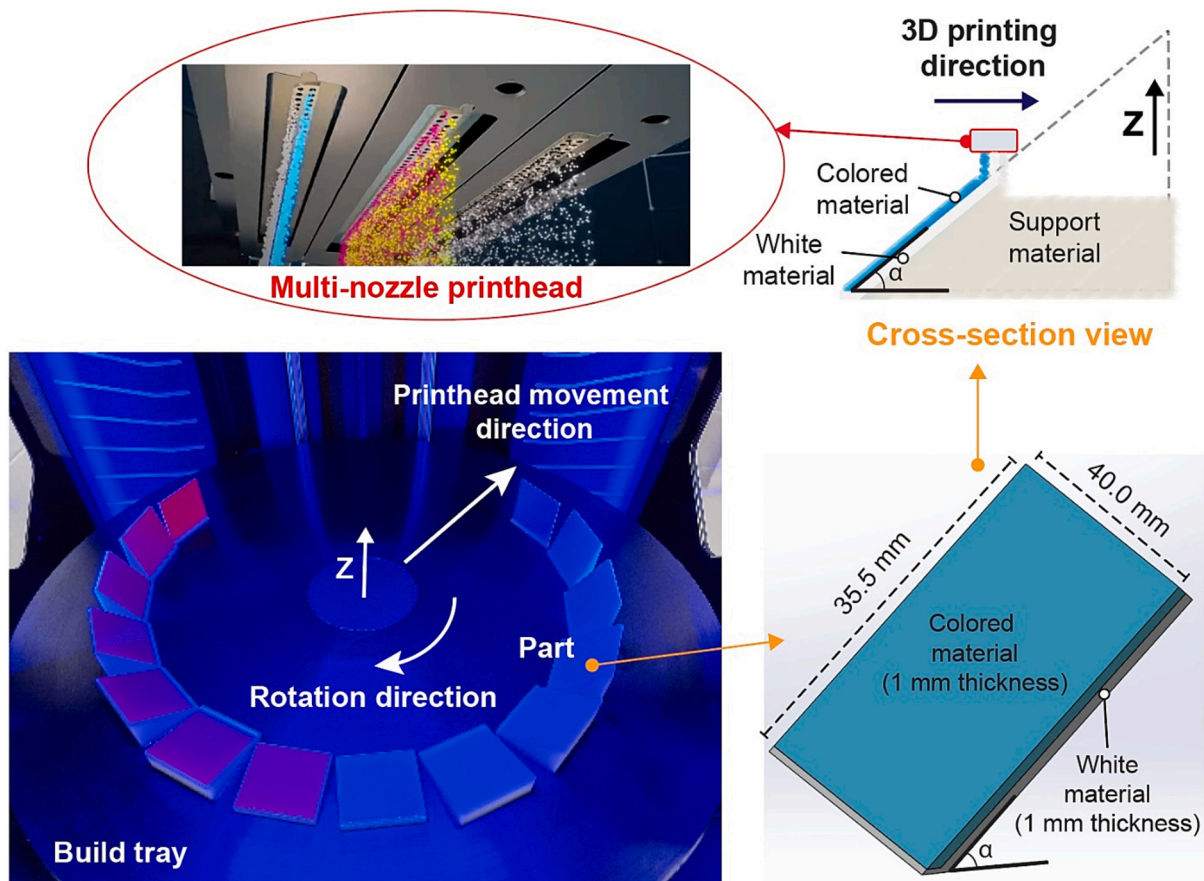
Manufactured MJT parts using PolyJet technology with a rotating build tray and multi-nozzle printhead. α represents the wedge angle in build orientation.
